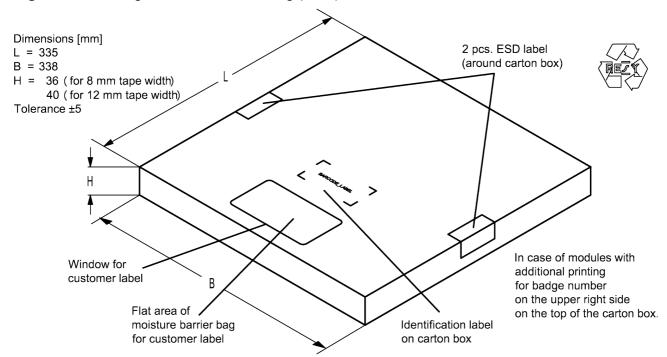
Drawing of folding box for reel with diameter of 330 mm.
